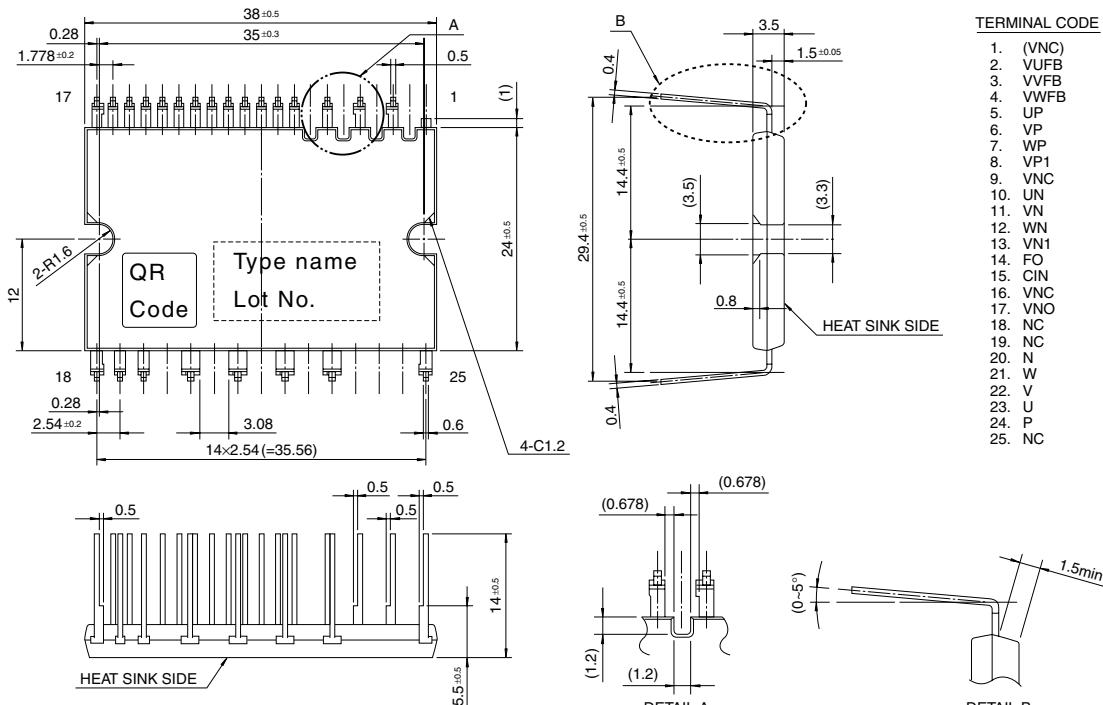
ZIGZAG TERMINAL TYPE PACKAGE OUTLINES (PS21962-C)
